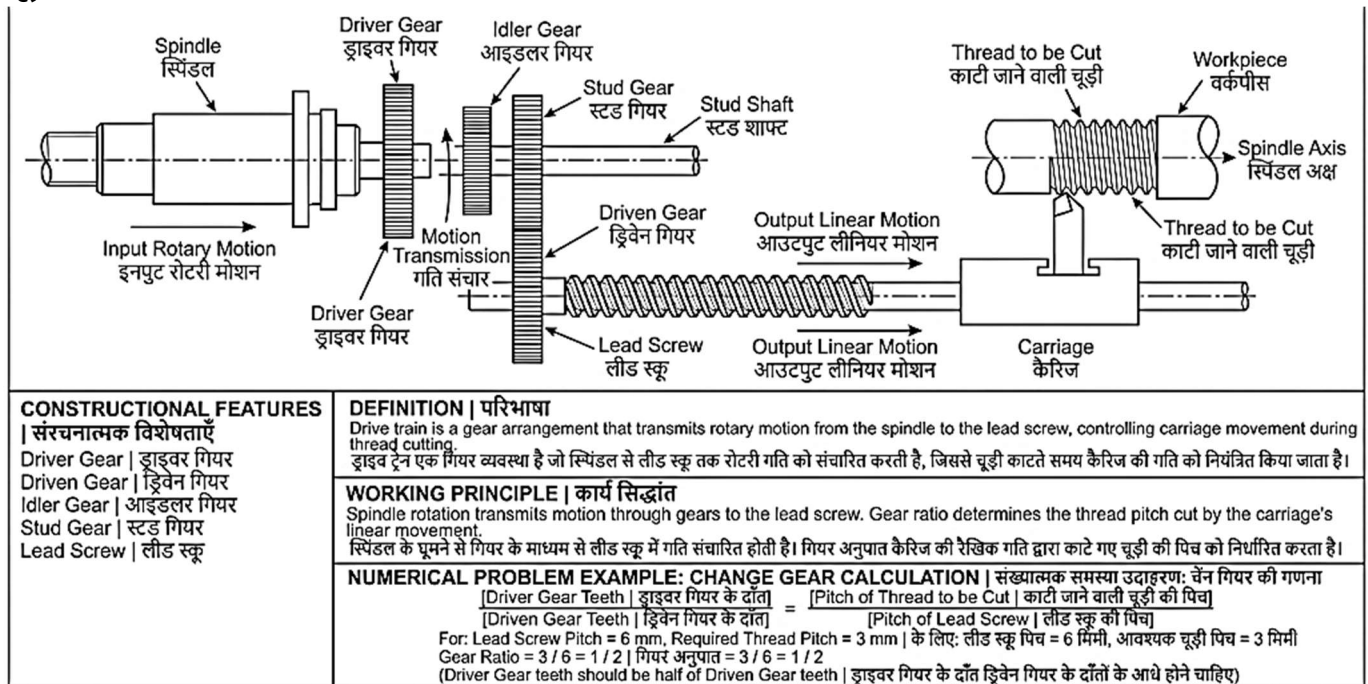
Lathe Drive Train for Thread Cutting and Gear Ratio Calculation | चूड़ी कटाई हेतु लेथ ड्राइव ट्रेन और गियर अनुपात की गणना
